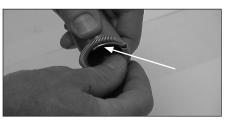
Thread Inner Spring until 1 inch of the Corona Ring protrudes.
